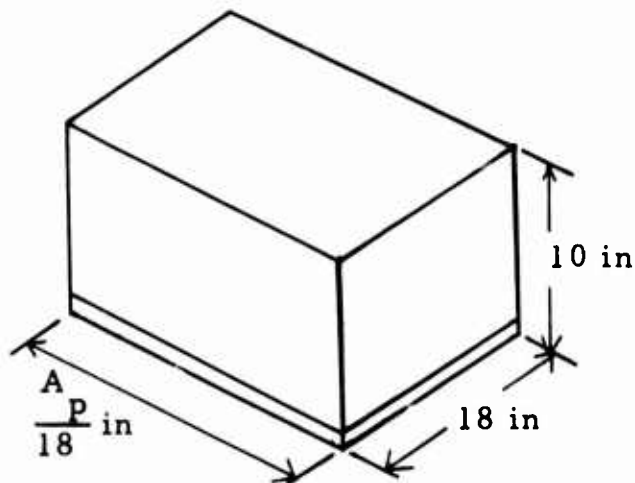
, BATTERY PACKAGL DIMENSIONS
